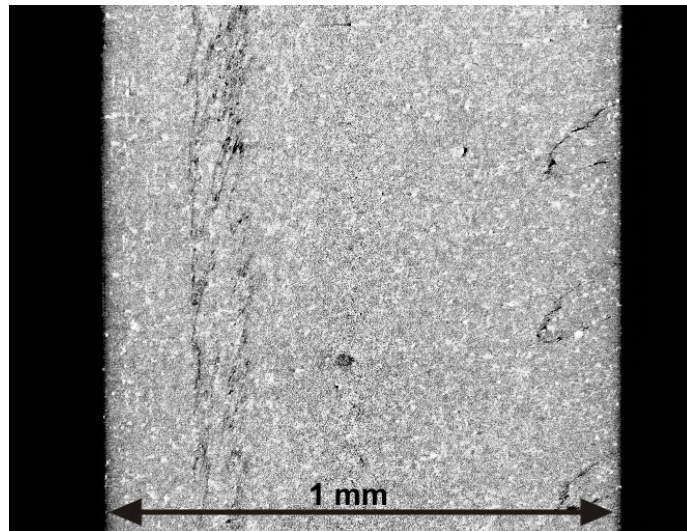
Cross section of the root flaw in a plane parallel to the welding direction.
